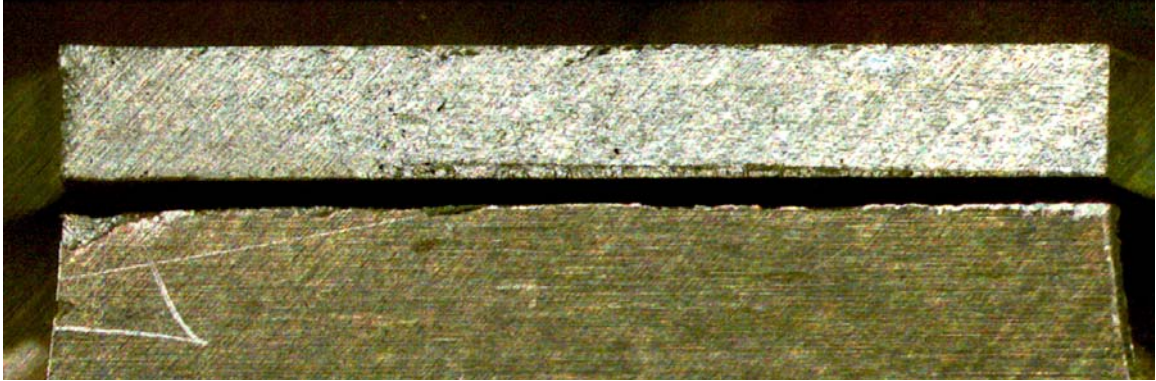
Specimen T-70-1, 7075-T6, Nf = 49,600 cycles, Defl = 15 mm. Fracture surface is smooth and unremarkable; no ratchet marks. (photo S-006)
